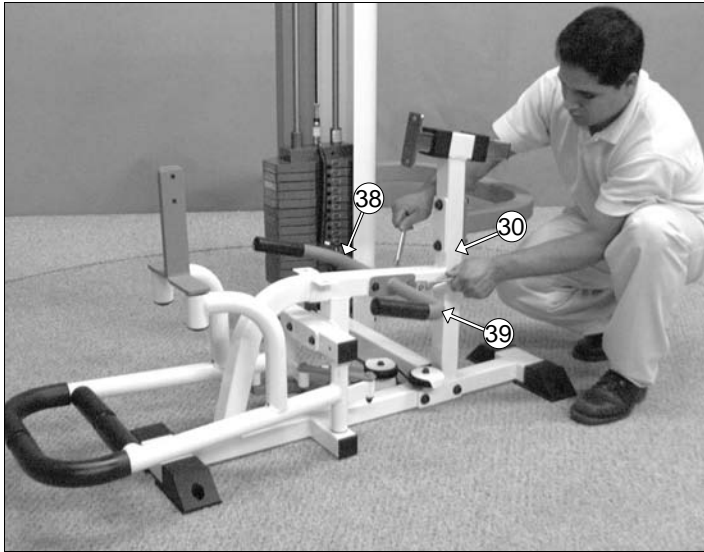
Attach the Right Handle (#38) and the Left Handle (#39) to the Main Frame (#30) using two Hex Head Cap Screws 3/8-16 X 3 1/4 (#78), four Flat Washers SAE 3/8" (#19), and two Nylon Insert Lock Nuts 3/8-16 (#79).
